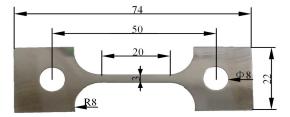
The plate tensile specimen geometric dimensioning (unit: mm).
